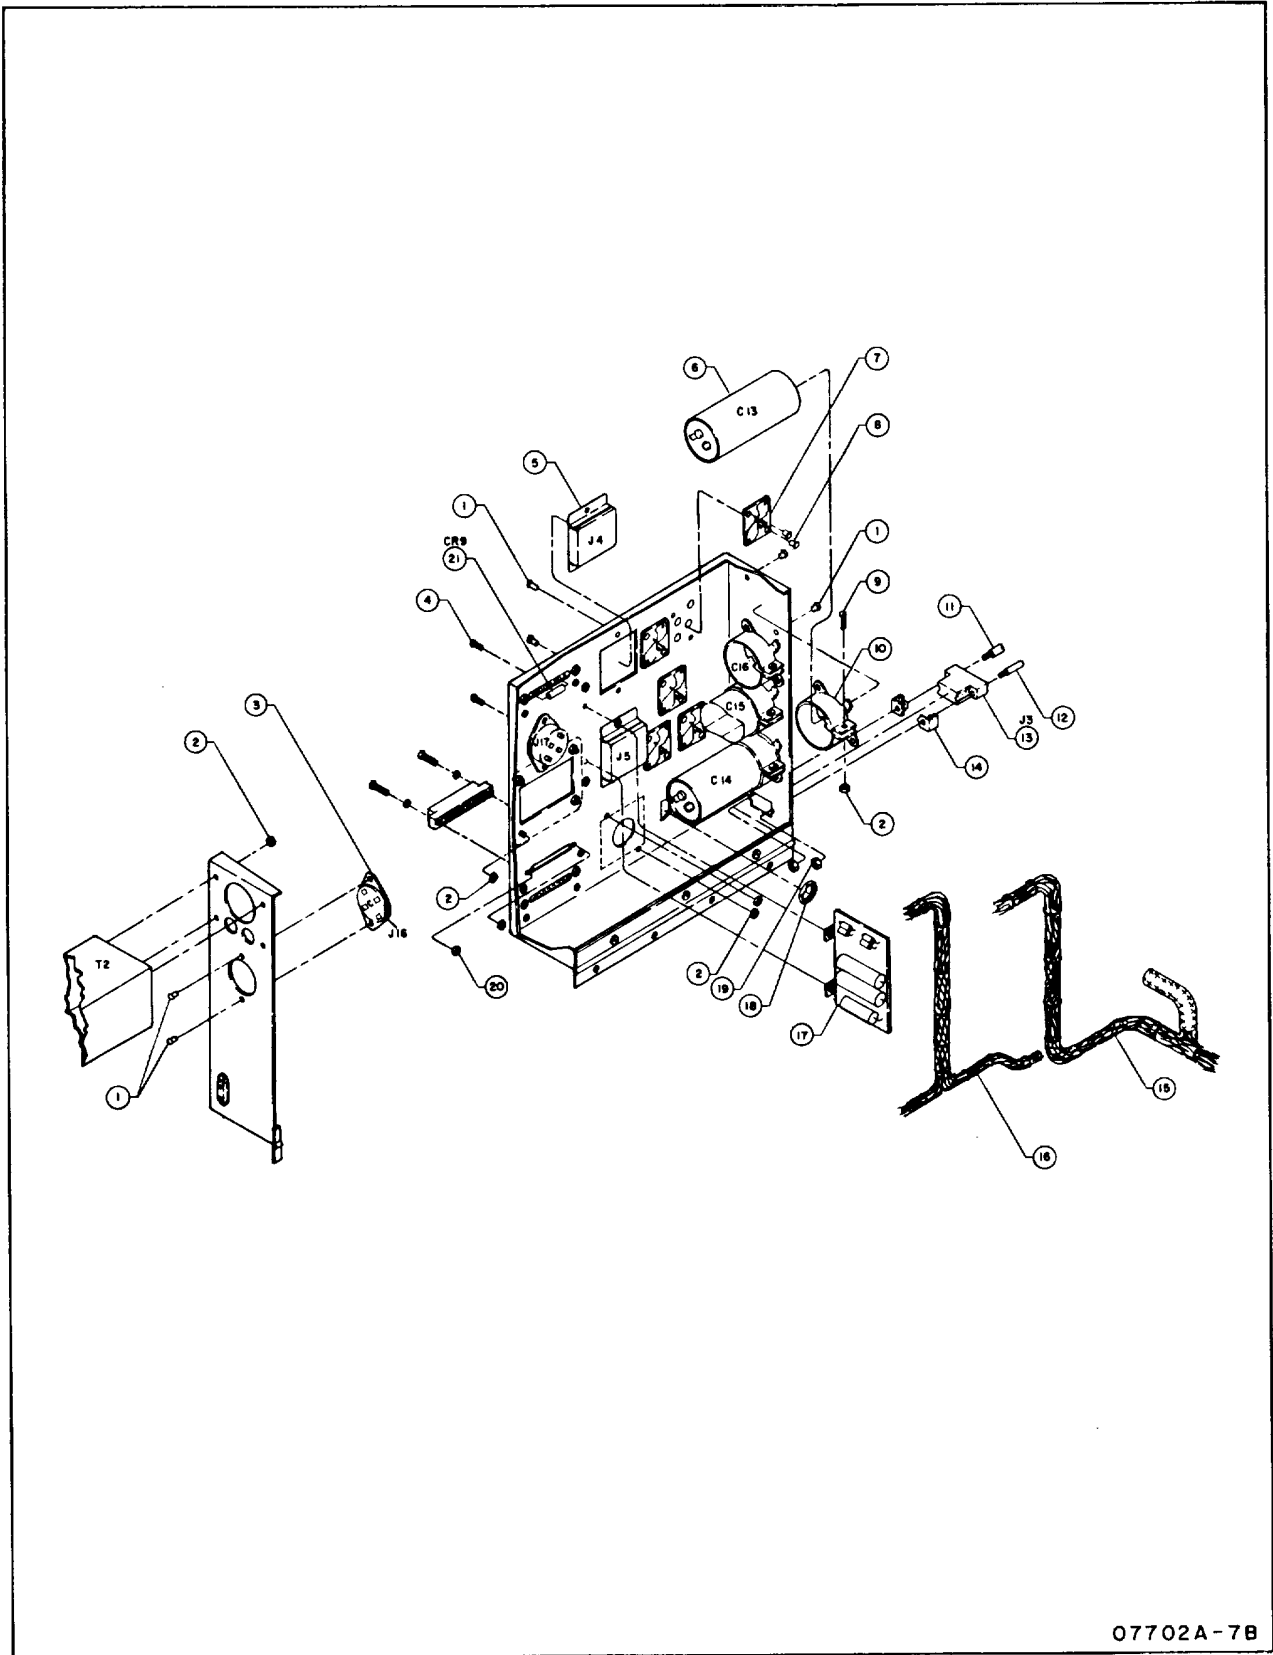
Power Supply Assembly, Bottom View (07702-60030)
